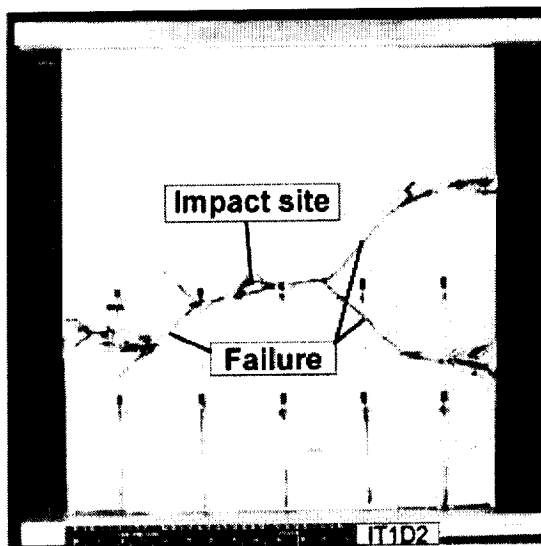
Failure location on skin side of Specimen IT1D2.
